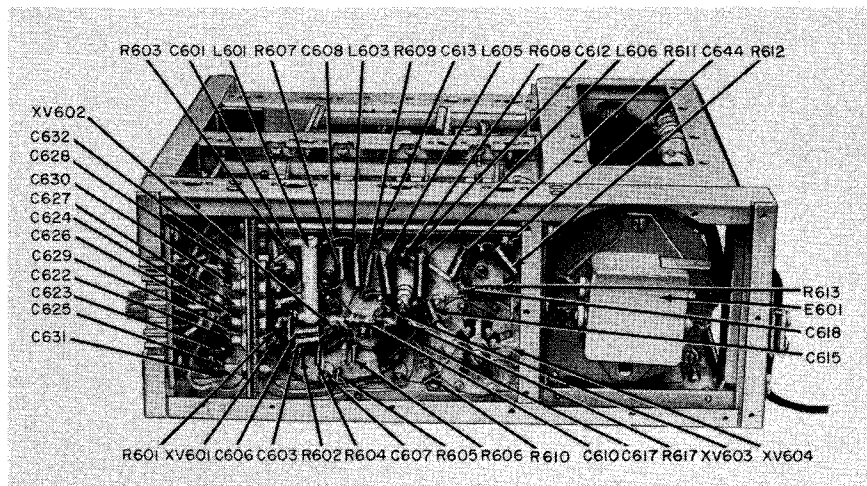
Amplifier-Oscillator AM-638C/URT, Bottom Cover Plate Removed
